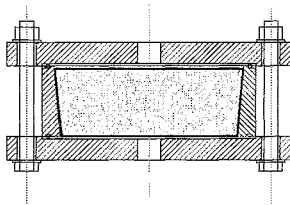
Test cell of steel with the *pressure* specimens of concrete inside. See drawing in appendix 5-1.
